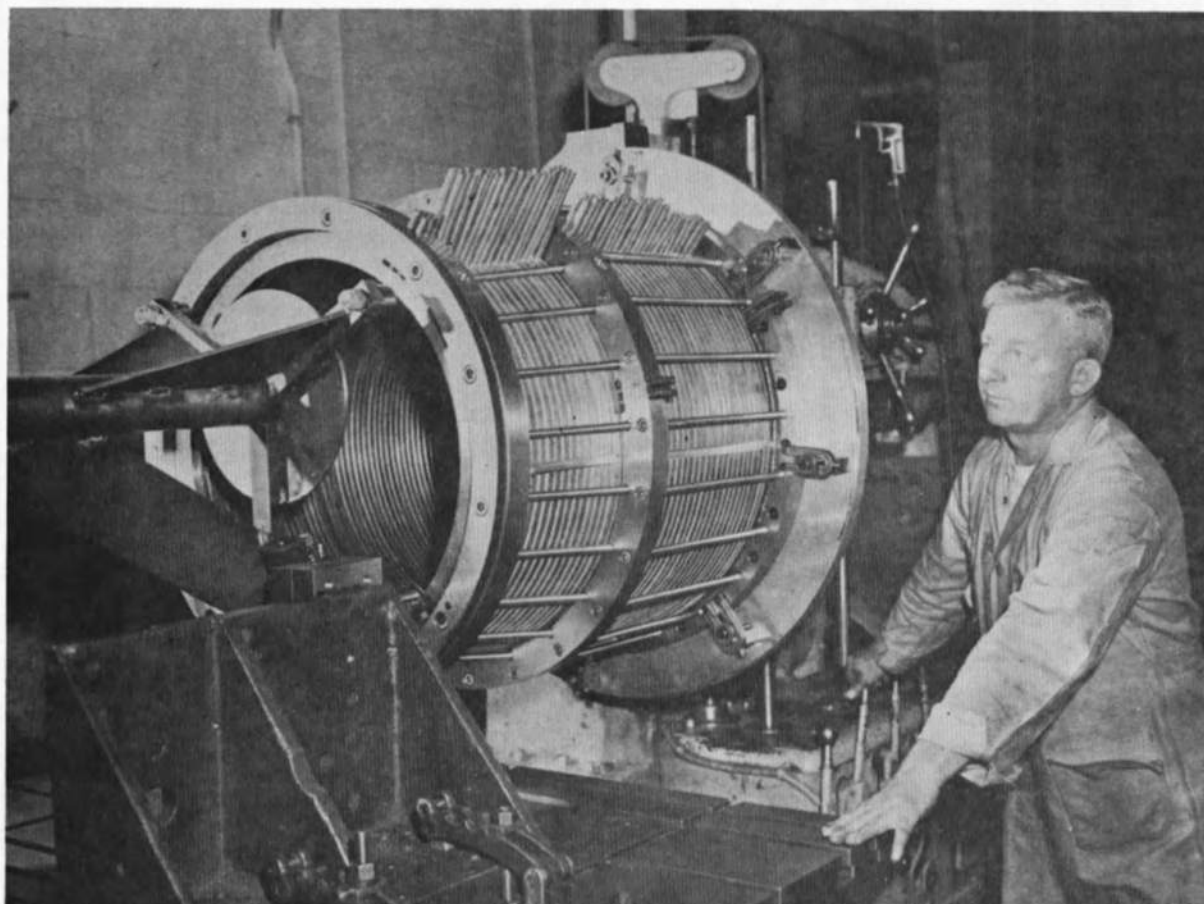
Supersonic Nozzle Setup for Final Contour Machining
